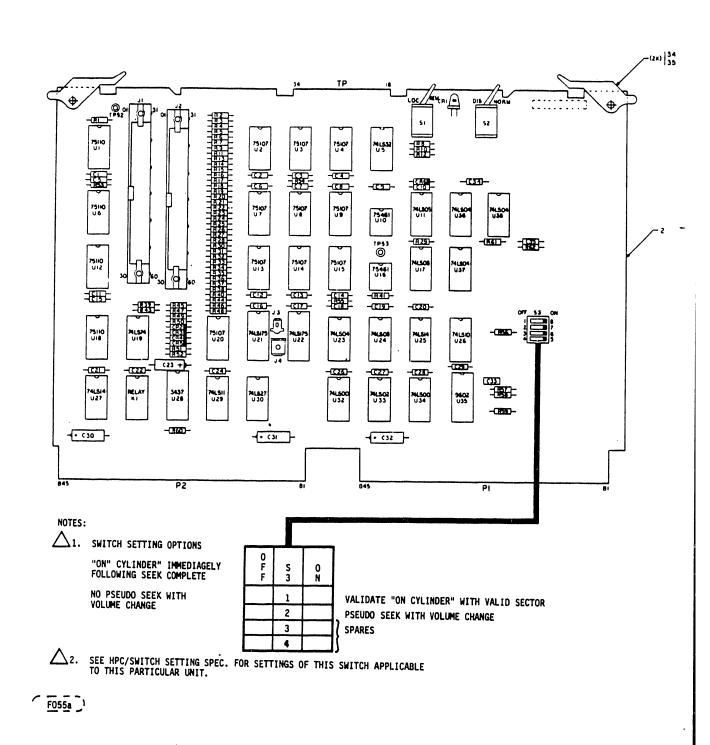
I/O CKT BOARD (SHEET 7 OF 9)
